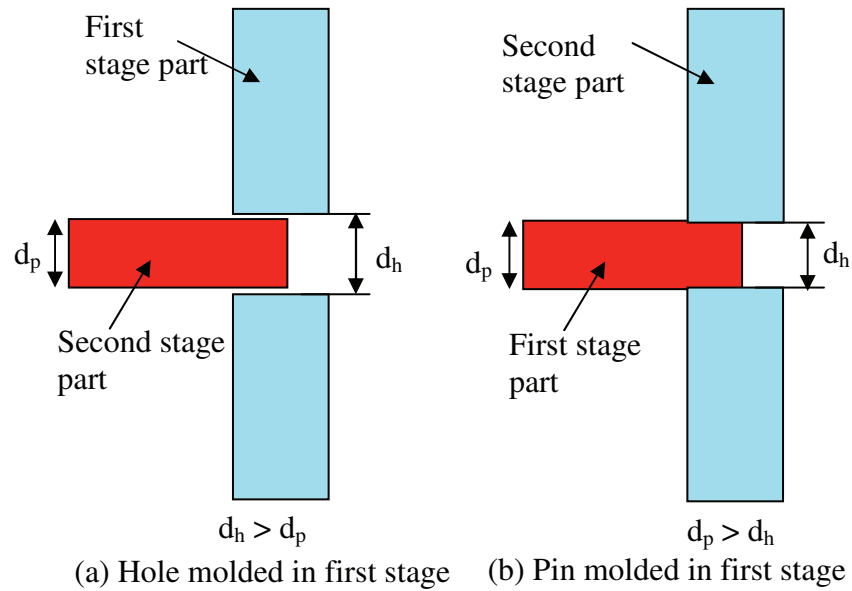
clearances in in-mold assembled Macroscale revolute joints
